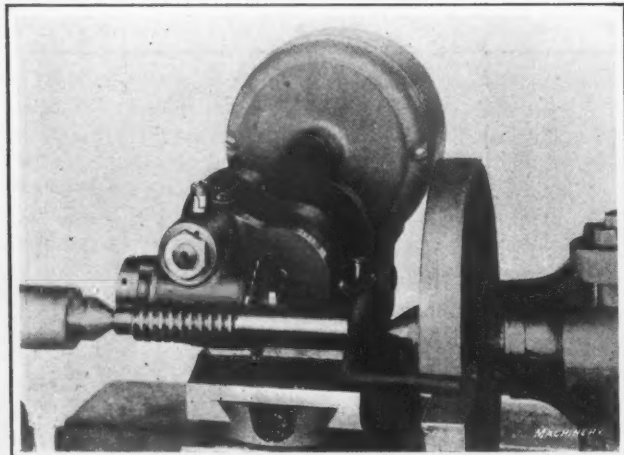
Thread Milling Attachment for Lathes developed for C. H. Tracey Co. by John R. Beckett
